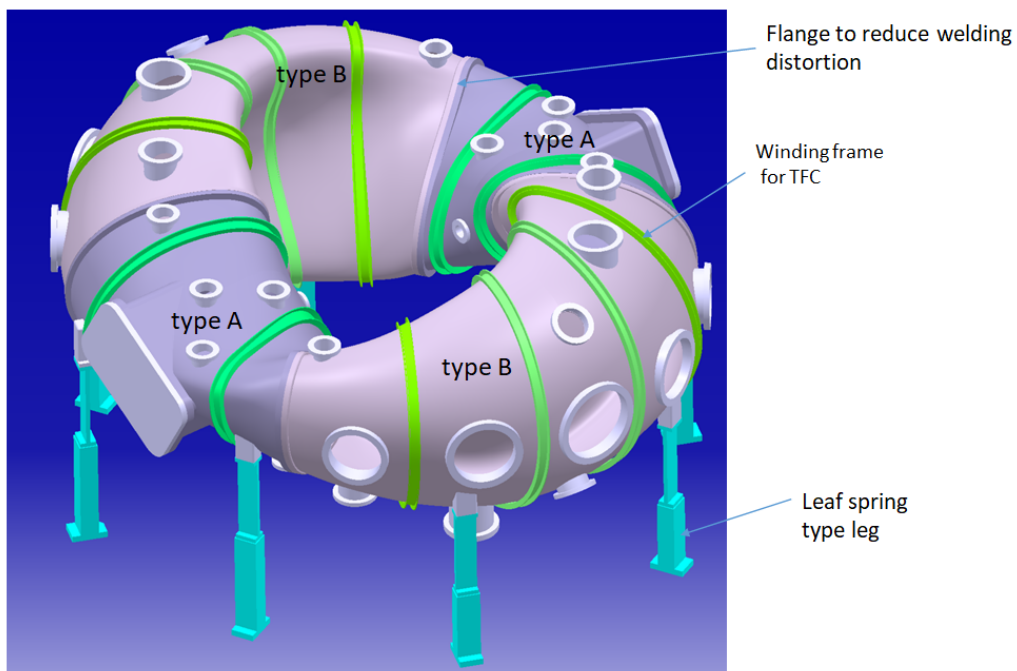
Schematic of the vacuum vessel, which will be manufactured by welding together four sections of two types in the toroidal direction and supported by eight leaf-type legs. The flanges to prevent welding deformation are also shown. The vessel has twelve winding frames for the TFC (shown in green).
